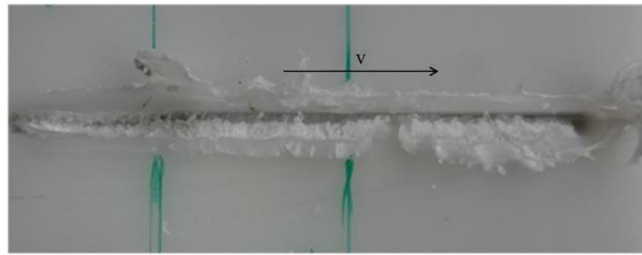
Weld with poor finish and reduced tensile strength obtained by FSW with conical pin tool [35].
